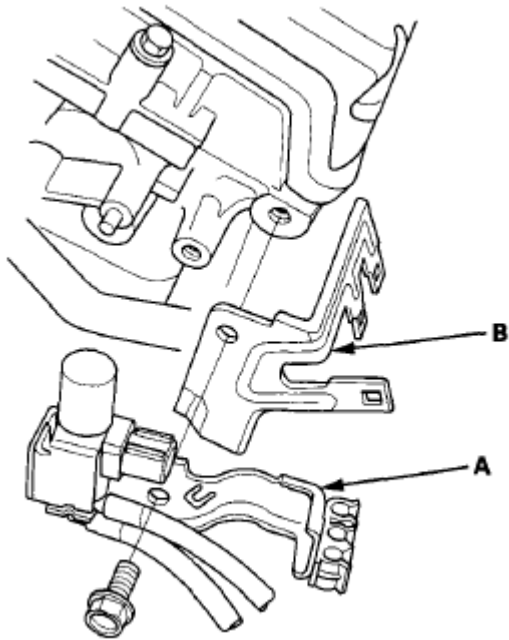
Removing Engine Mount Control Solenoid Valve Bracket
